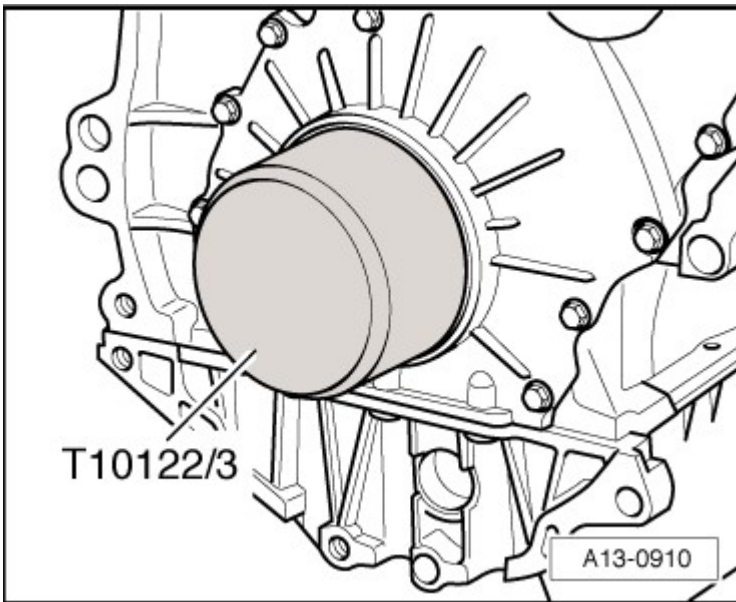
Pressing In Oil Seal With Press Tool T10122/3 Evenly And Flush
